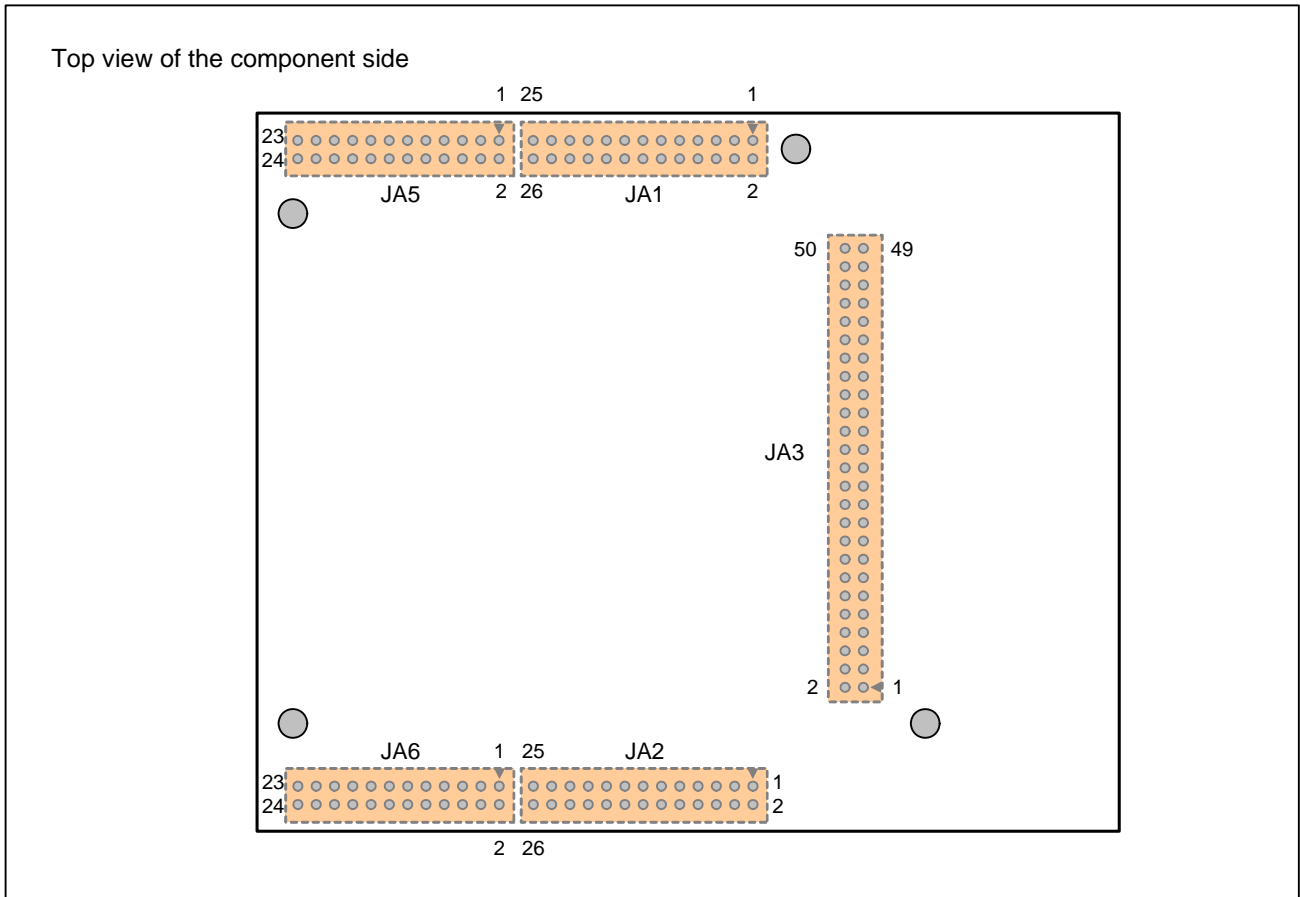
Application Header Pin Assignments (Top View of the Component Side)
